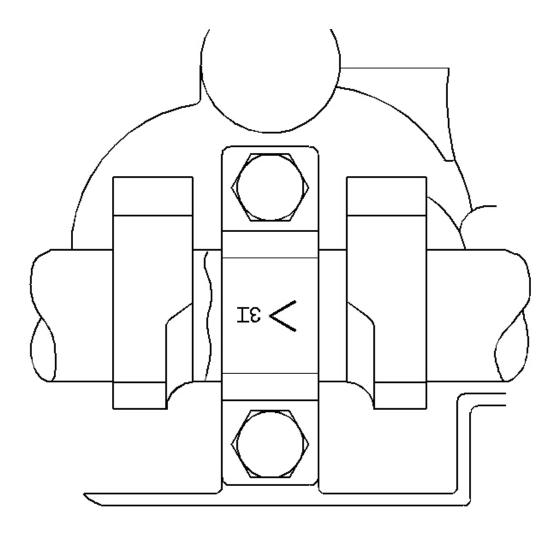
Identifying Camshaft Bearing Cap Markings Courtesy of GENERAL MOTORS CORP.
